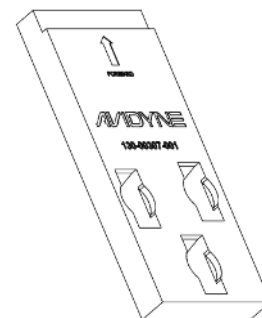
Standoff Locator Tool P/N: 130-00307-001 (G3)
